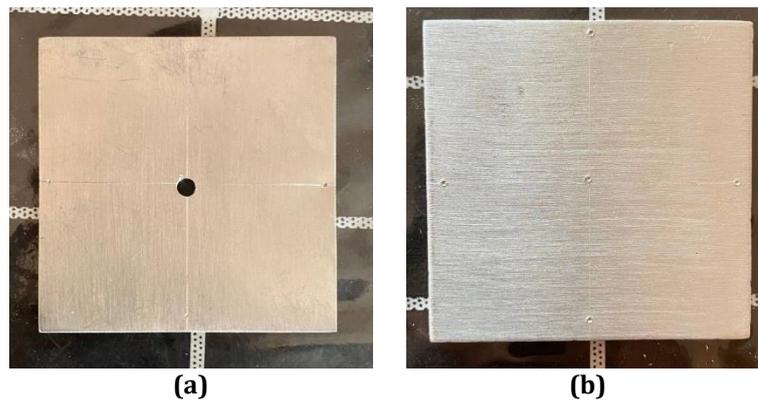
Aluminum panels drilled by (a) the prototype and (b) BOSCH GSR 120-Li Cordless Drill
